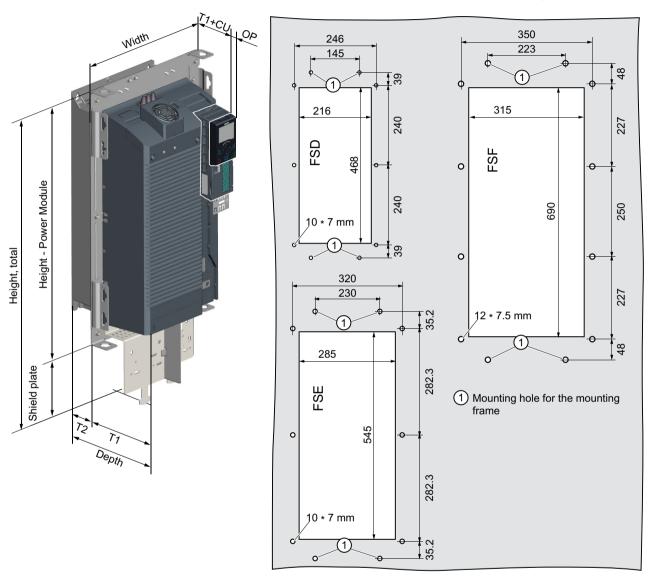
Dimension drawing and drilling dimensions for frame sizes FSD ... FSF
